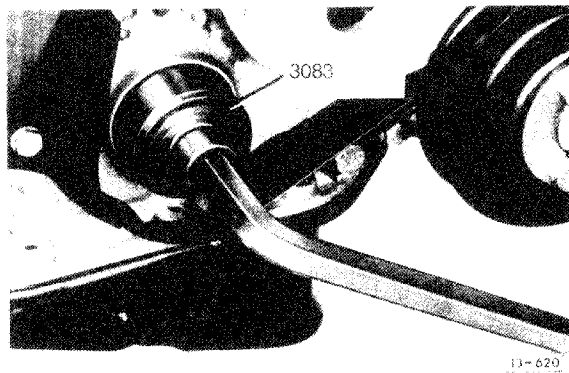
Front crankshaft oil seal being installed, using Volkswagen special tool no. 3083.
